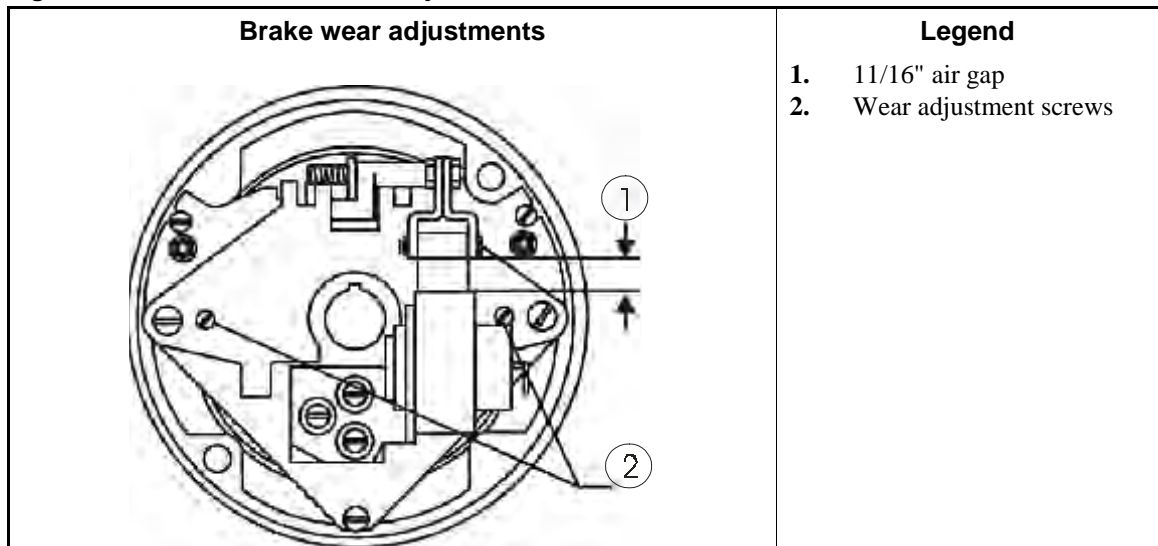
CF40xxxx and CL40xxx motor and gear reducer maintenance points
